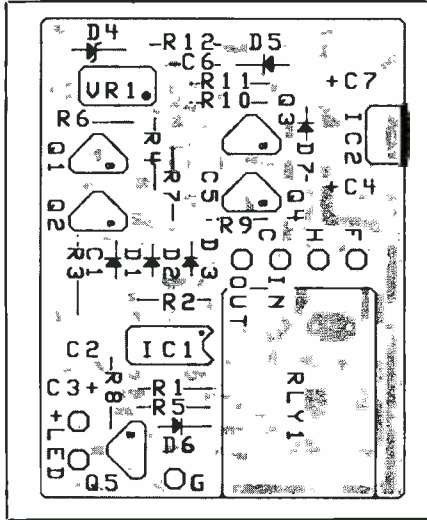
Wiring guide for pc board. Use this as a rough layout guide if you use perforated-board construction.
